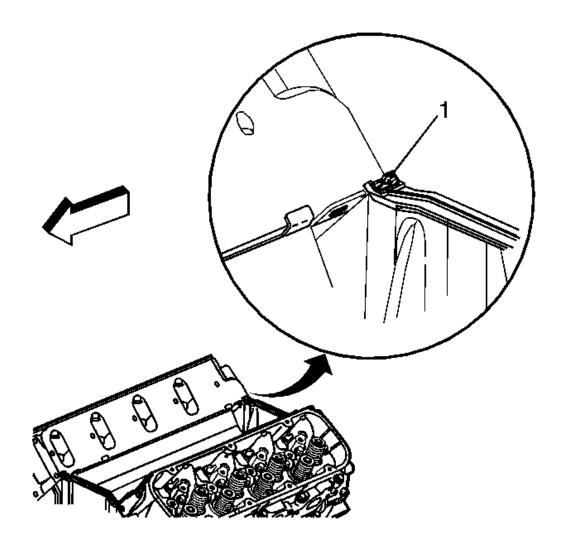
Applying Sealer Onto End Seals At Engine Block/Cylinder Head Locations Courtesy of GENERAL MOTORS CORP.
